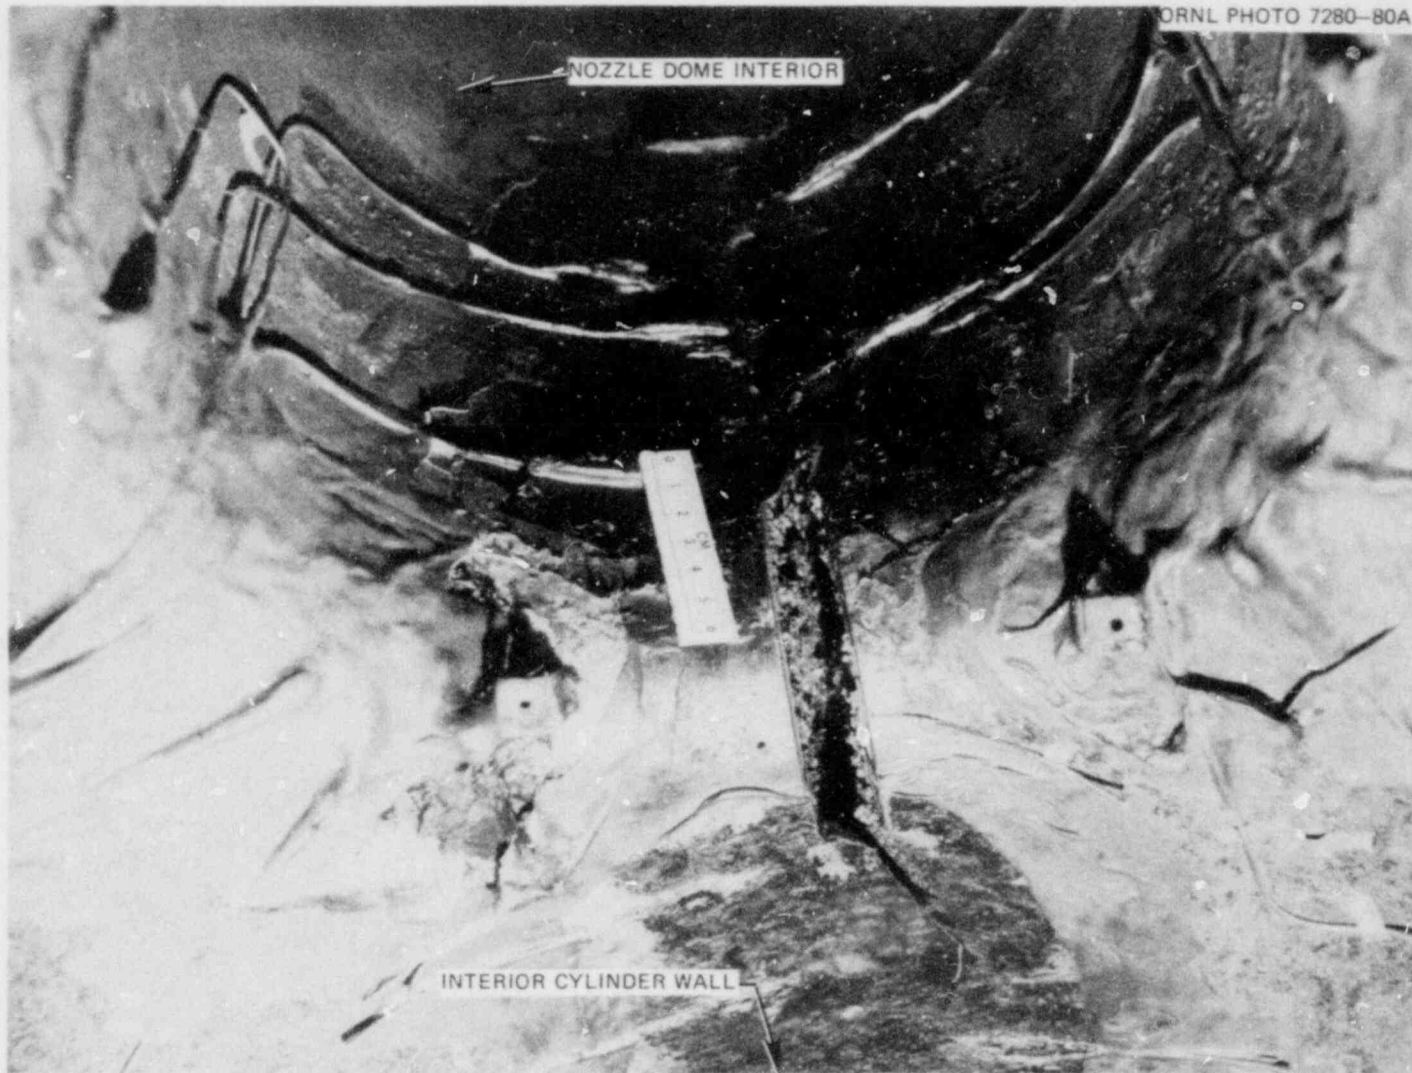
ITV-5, inside vessel view of flaw and flaw fracture surfaces prior to removal from vessel.
